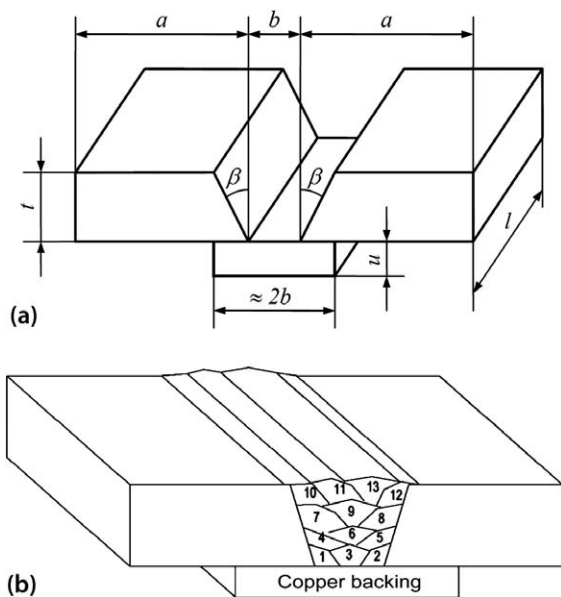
a) Shape and dimensions of a weld specimen as indicated in the ISO 15792-1 standard; b) sequence of the welding passes
